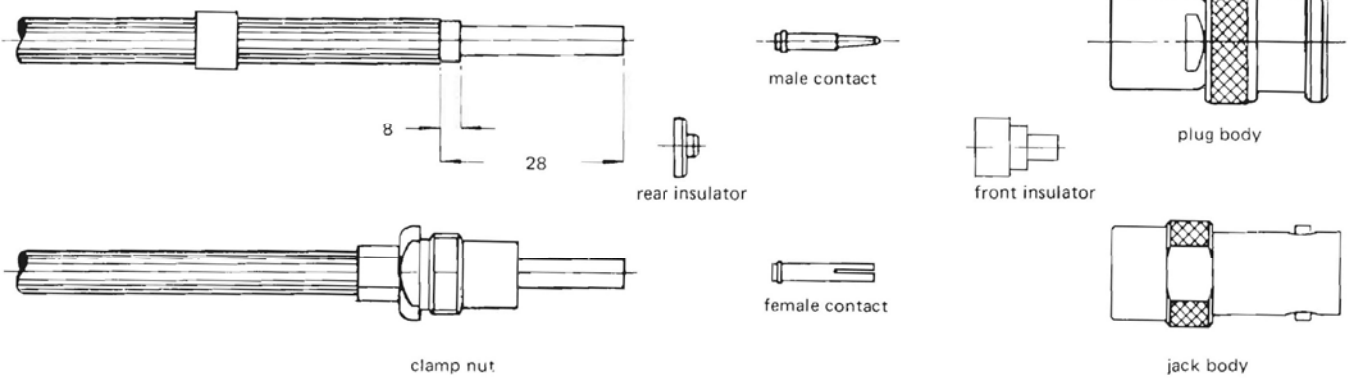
Plugs and jacks: captive contact, MIL crimp
